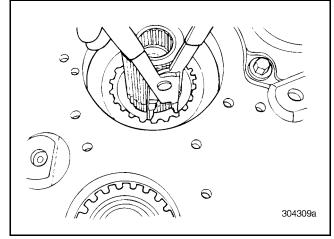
Removing Snap Ring from Inside Reverse Speed Gear
